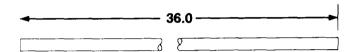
Fog Oil Hose Assembly (37-15-2302-60)
